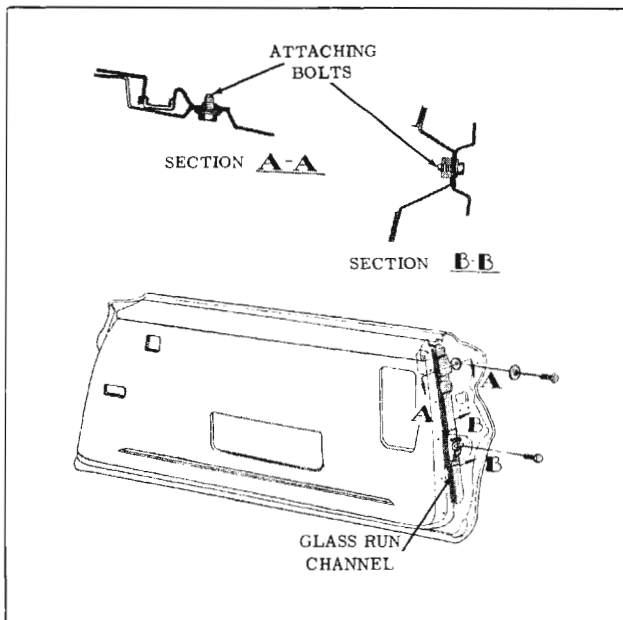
Front Door Glass Run Channel (47 and 67 Styles)
